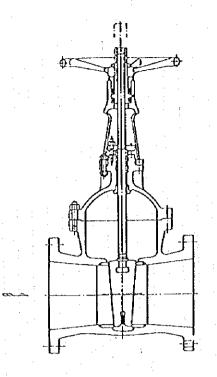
SHORT PIPE ARRANGEMENT FOR FLANGE TYPE VALVE
